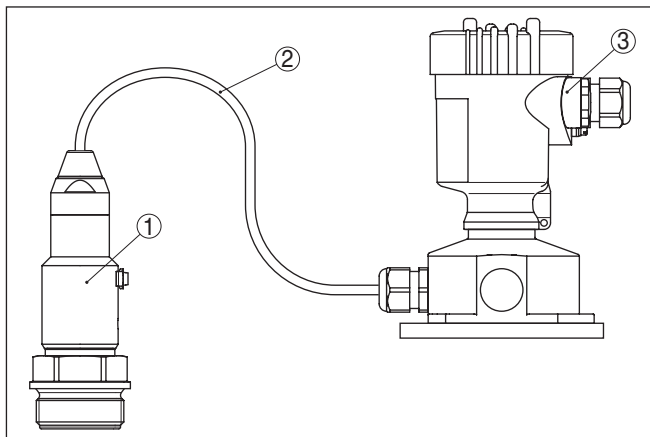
VEGABAR 81 in IP 68 version 25 bar with axial cable outlet, external housing
